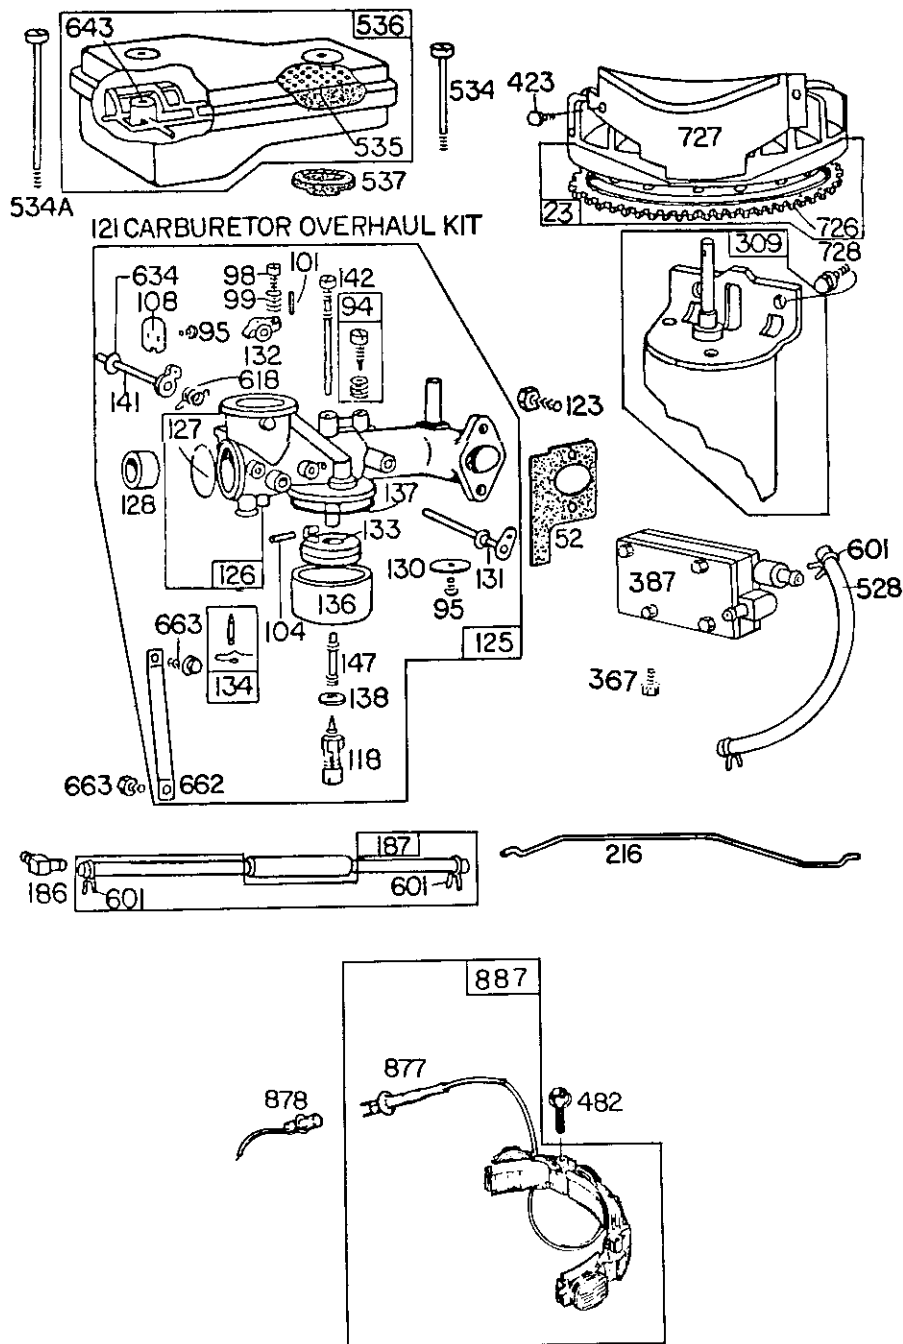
A. MODEL 1113 (BRIGG'S & STRATTON ENGINE ASSEMBLY 252707-0189-01)
